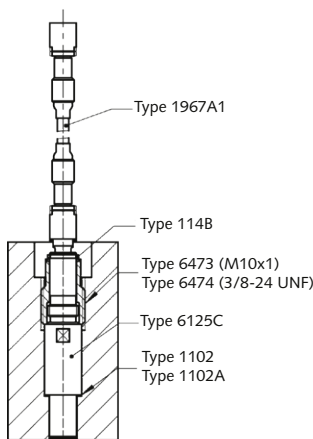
Direct mounting of sensor Type 6125C1... with mounting nut
